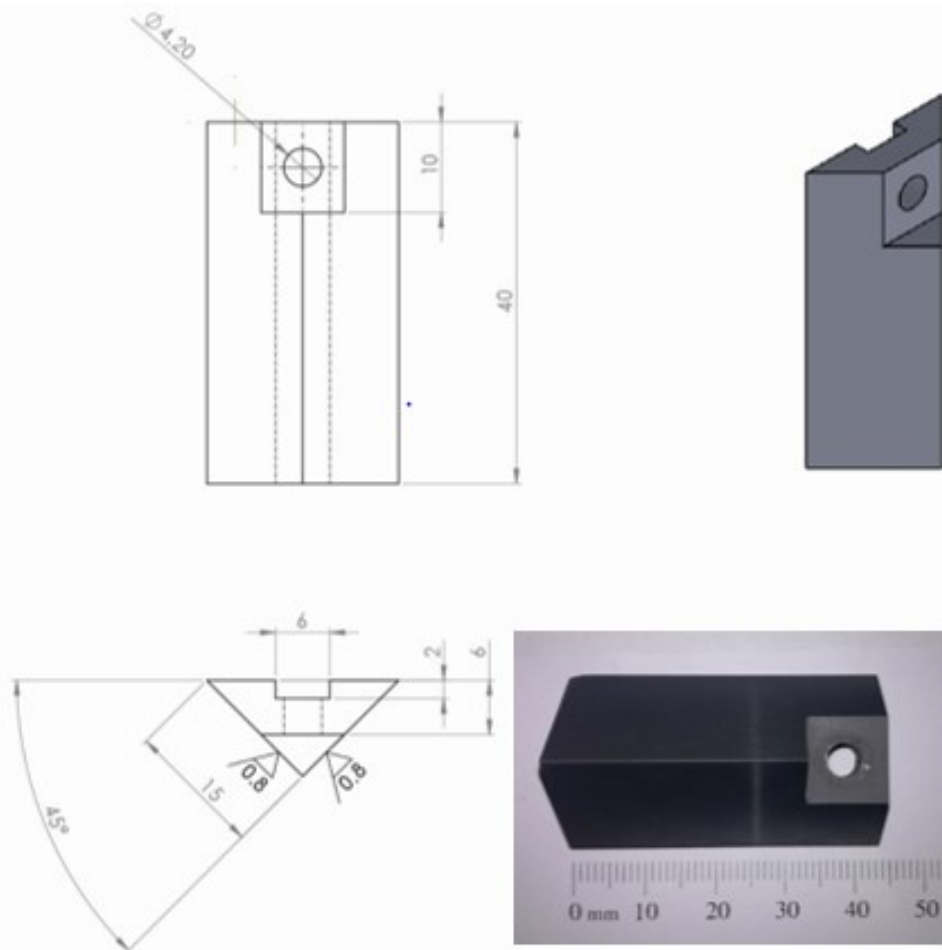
Technical drawing and picture of the wear tool. Units: dimensions (mm), roughness (μm), angle ($^\circ$).
